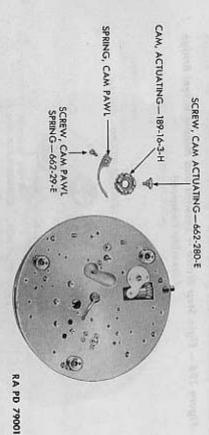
Elgin Stop Watch — Cam Assembly Removed
